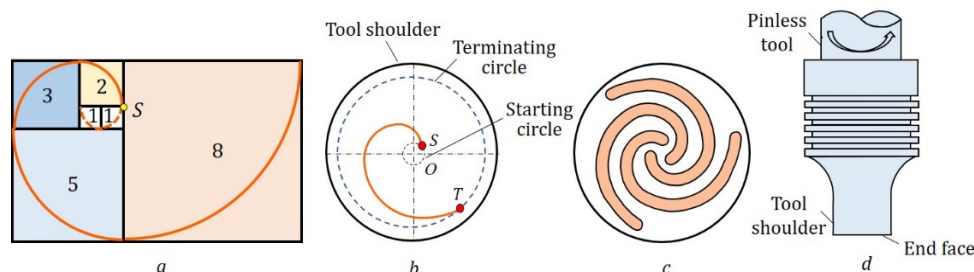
Schematic diagram of Fsc groove tool design: *a* – Fsc; *b* – position of Fsc on the end face; *c* – generated Fsc grooves; *d* – main shape of pinless tool
